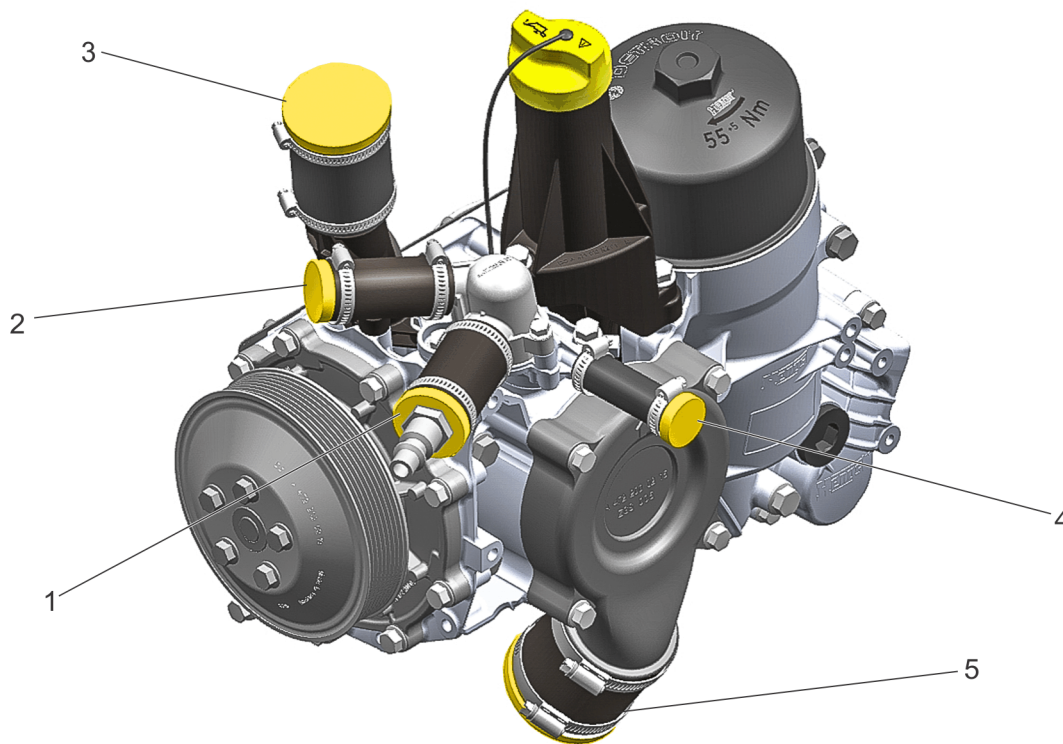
DK1470E16024-14 - Threaded Plug (M14)
